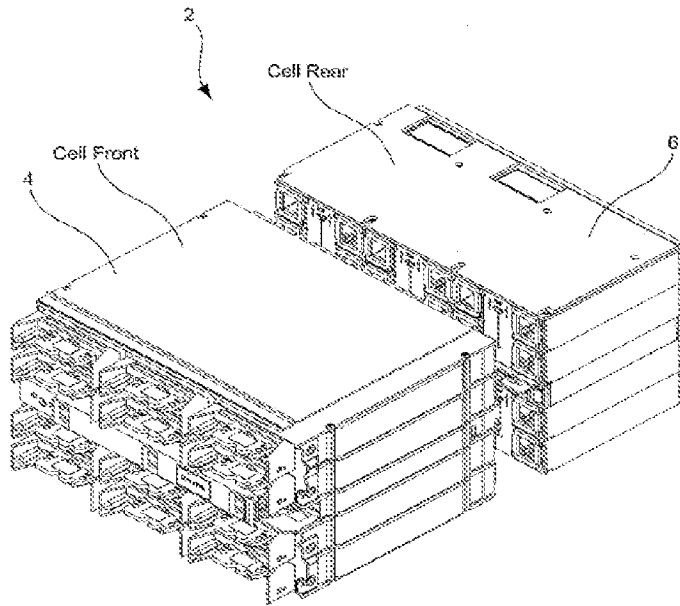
shows schematically a perspective view of a disk drive test cell.
